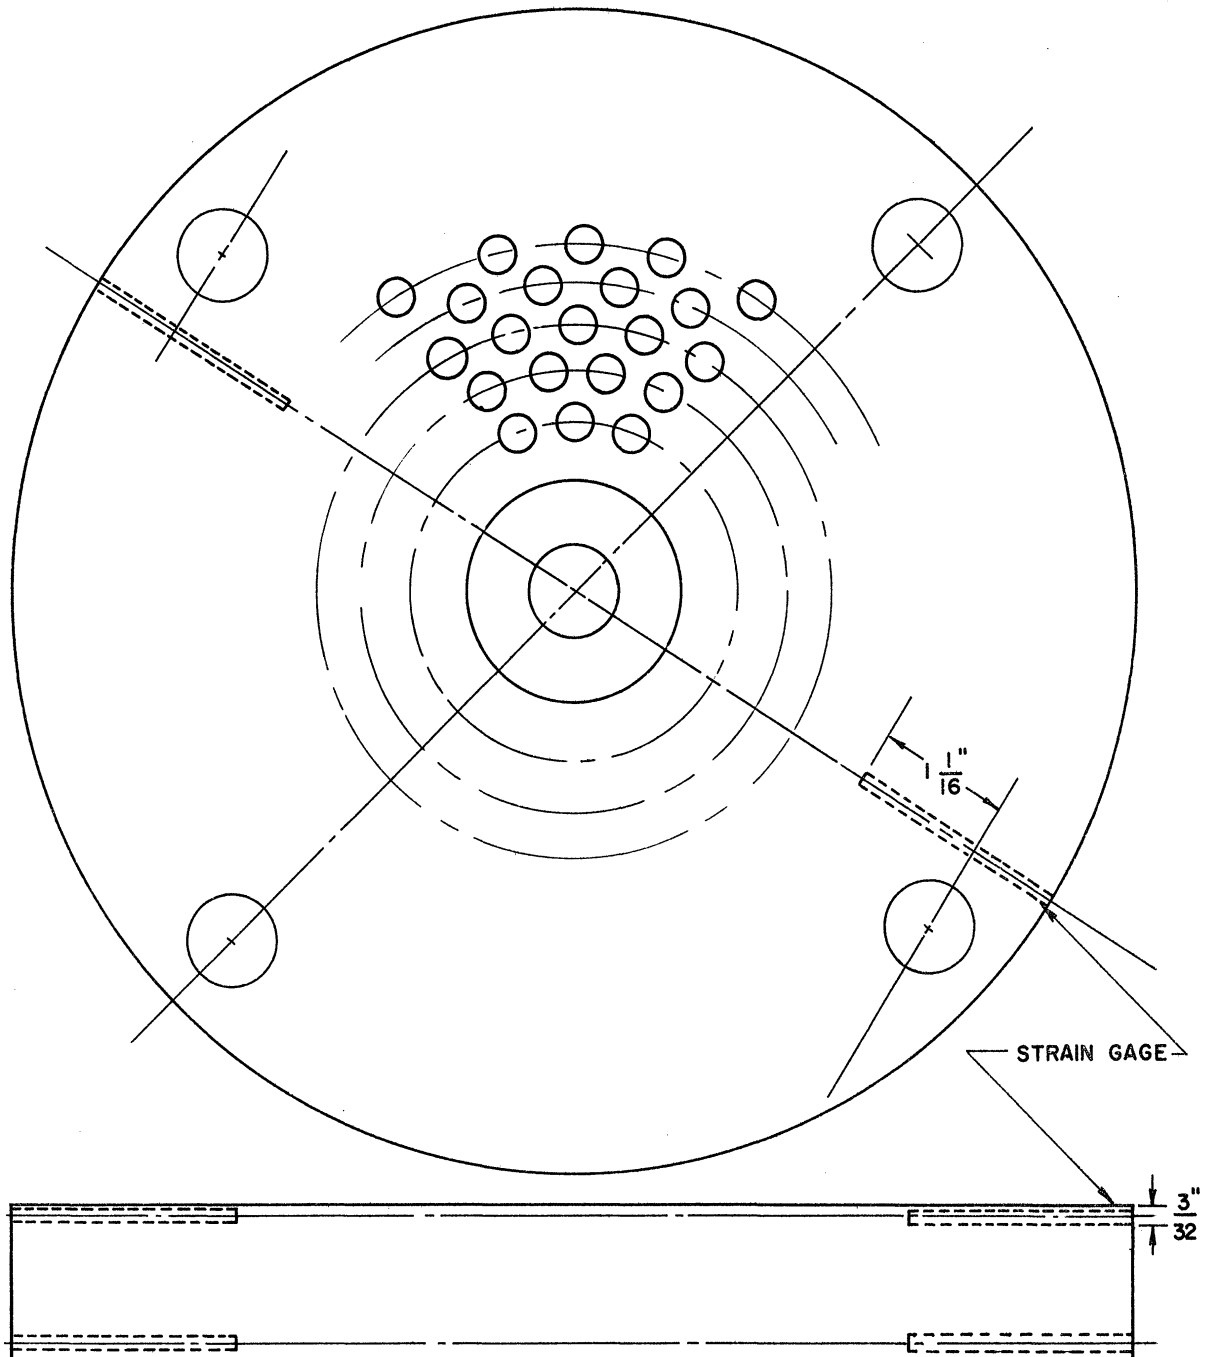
Internally Strain Gaged Extruder Die Plate.
